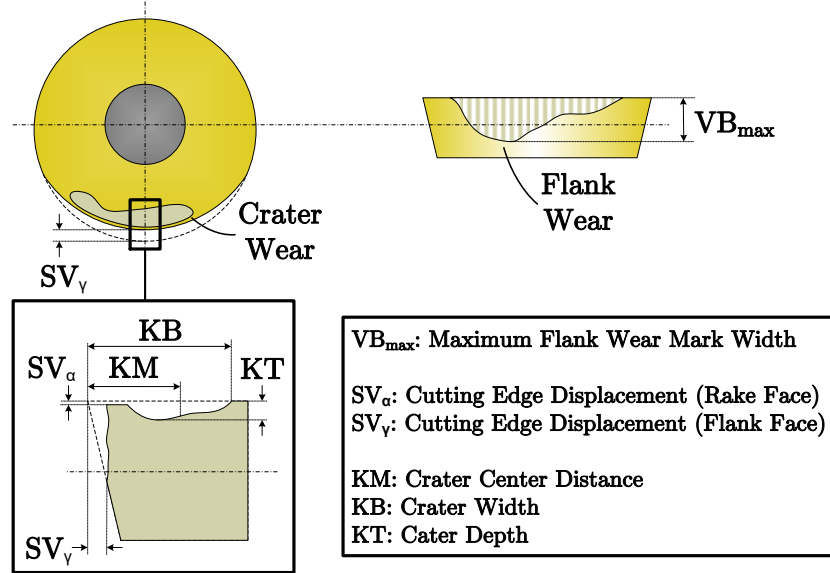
Tool wear measurement parameters according to DIN ISO 3685 shown for the cutting edge of a circular insert, adapted from [13, 61].
